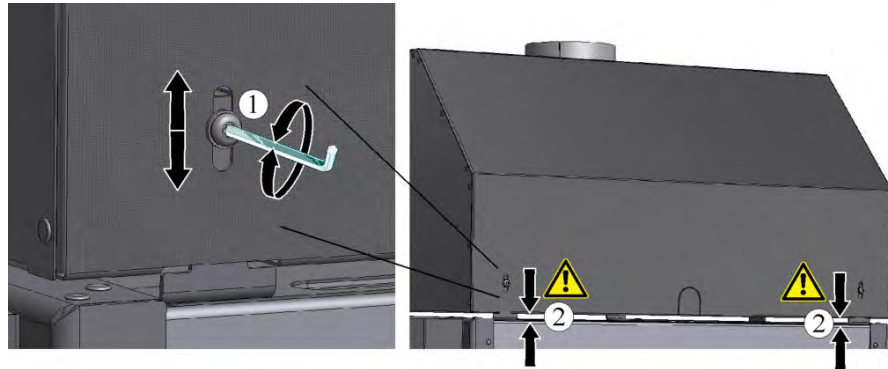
Setting the height of the exhaust hood (similar to picture)
